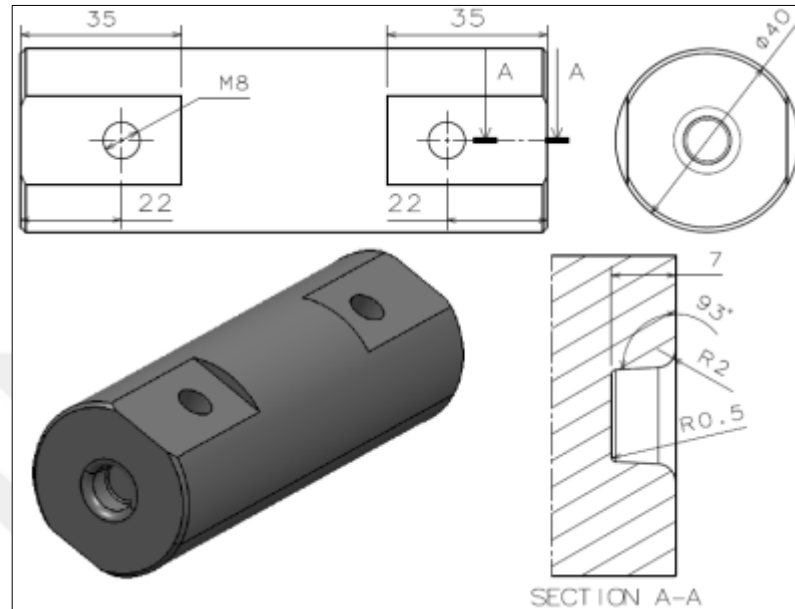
Three-dimensional model of cylindrical weld extrusion block
